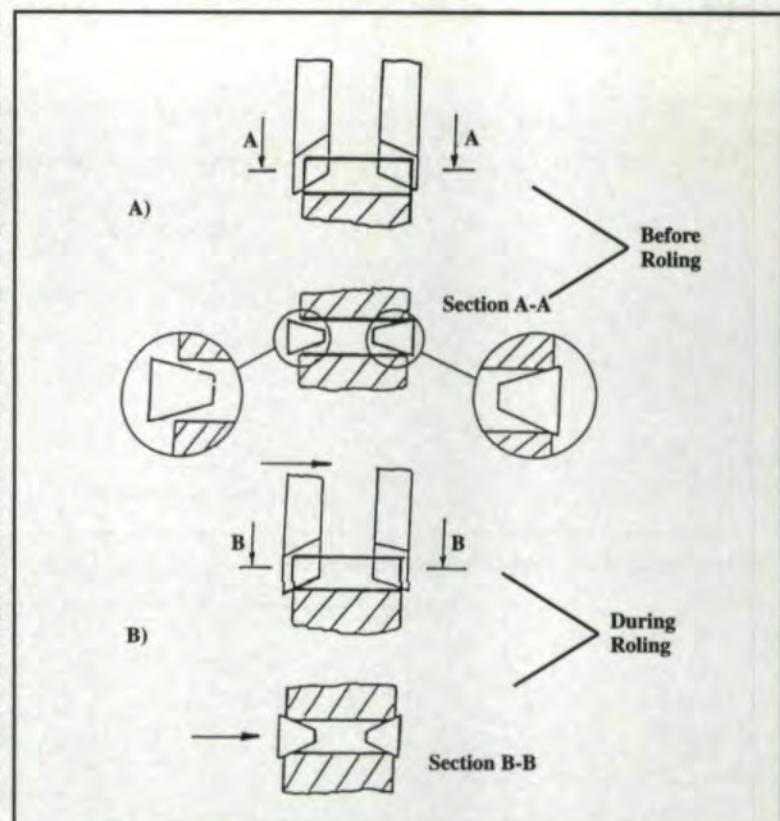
A) Nonsymmetrical chamfer tools; B) Symmetrical chamfer tools.
